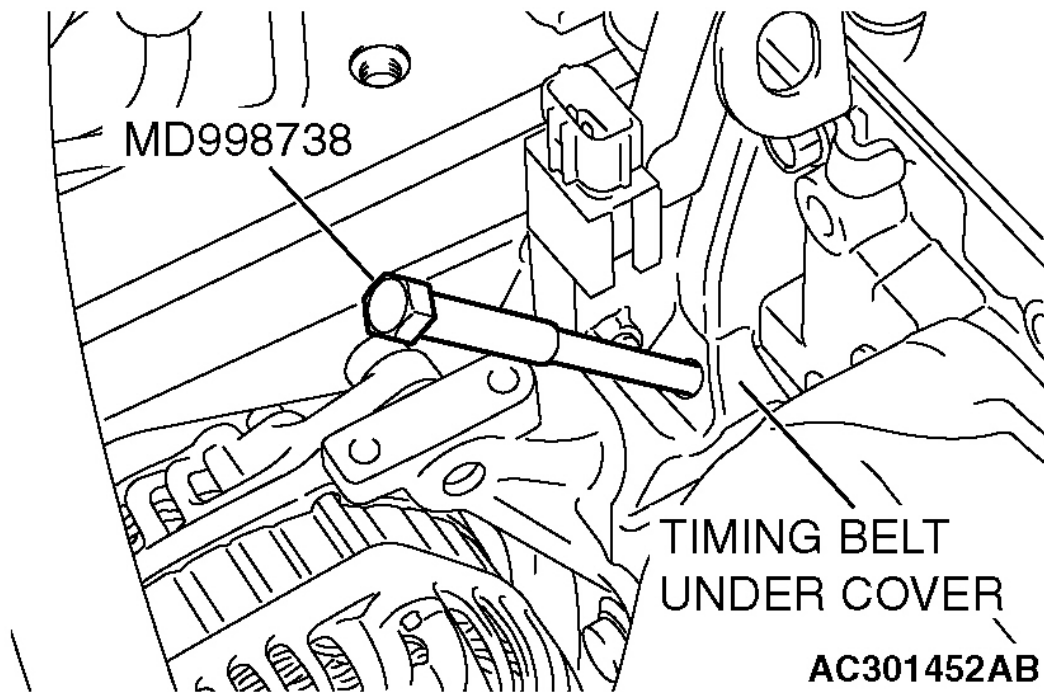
Removing Timing Belt Under Cover Rubber Plug
